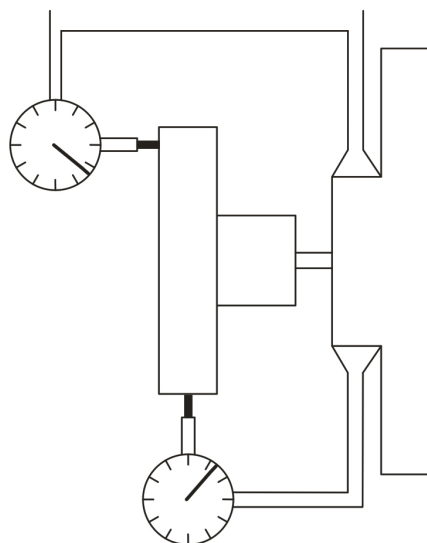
MEASUREMENT OF THE RUN-OUT ON THE COUPLING HALF
